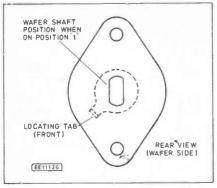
Position of the range switch shaft assembly prior to fitting the contact wafer.
